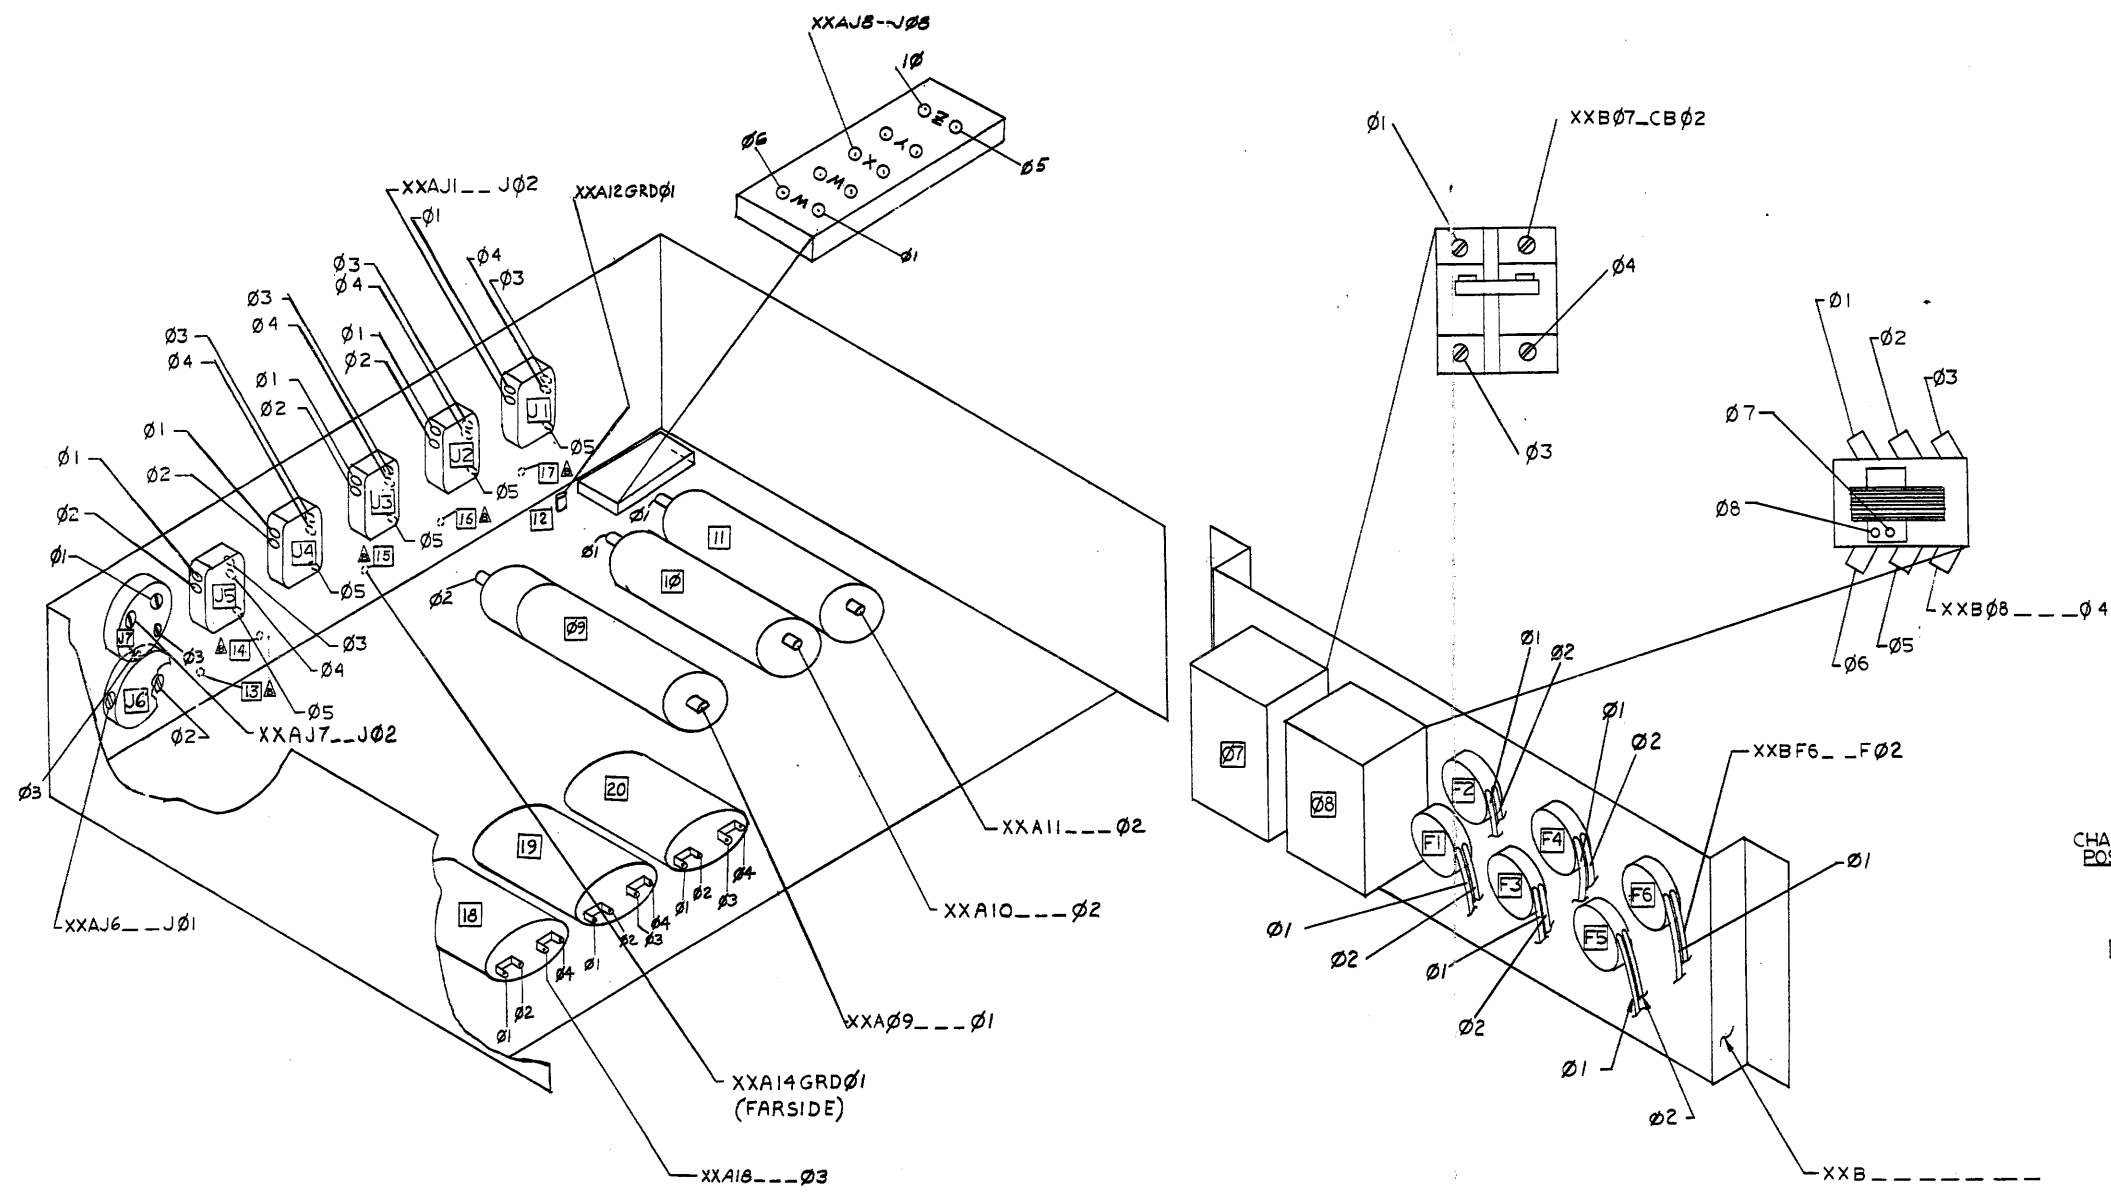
Coding Diagram (Ref. Drawing 70031976, Rev.D)
